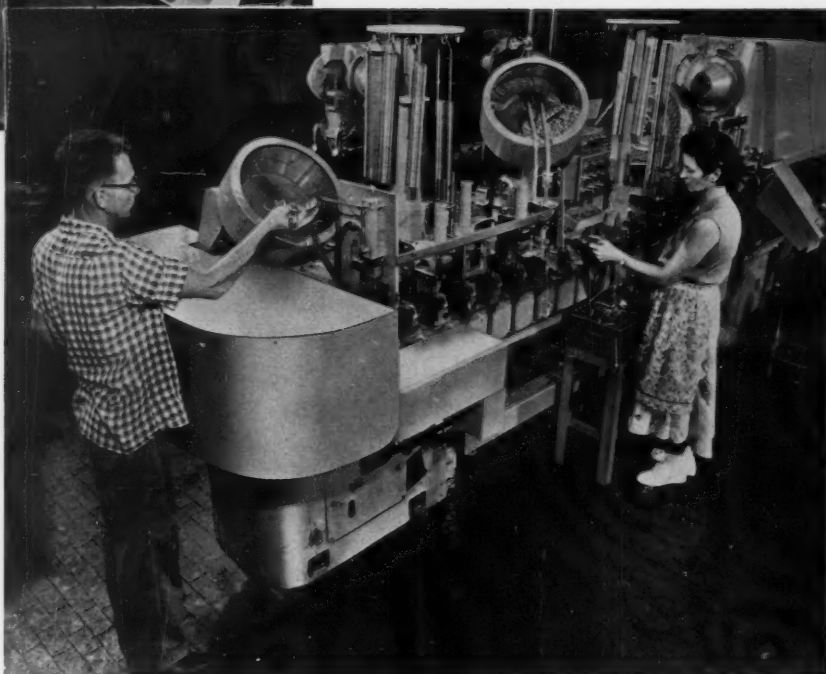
(Right) Manual loading station of a semi-automatic machine for assembling distributor contact brackets. Coil stock seen at the left is stamped into washers on the machine.
